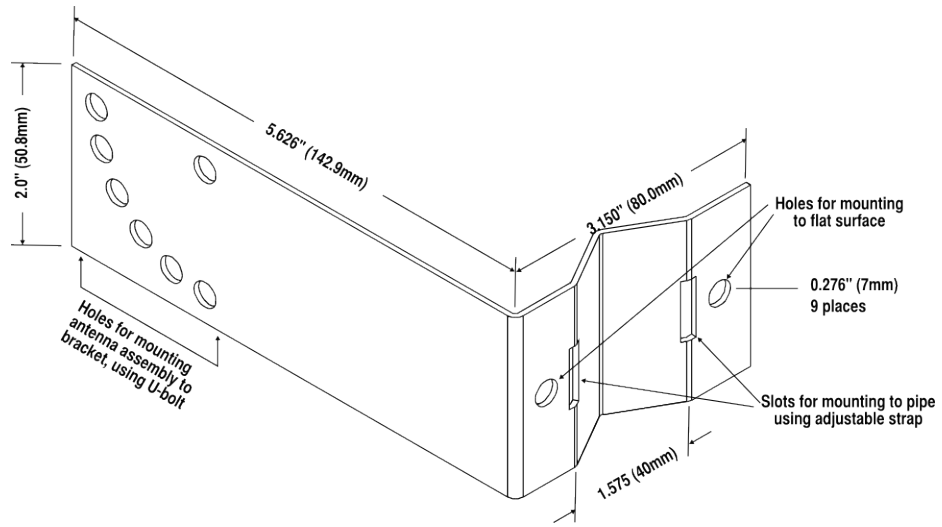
GNSS Antenna Mounting Bracket Dimensions
